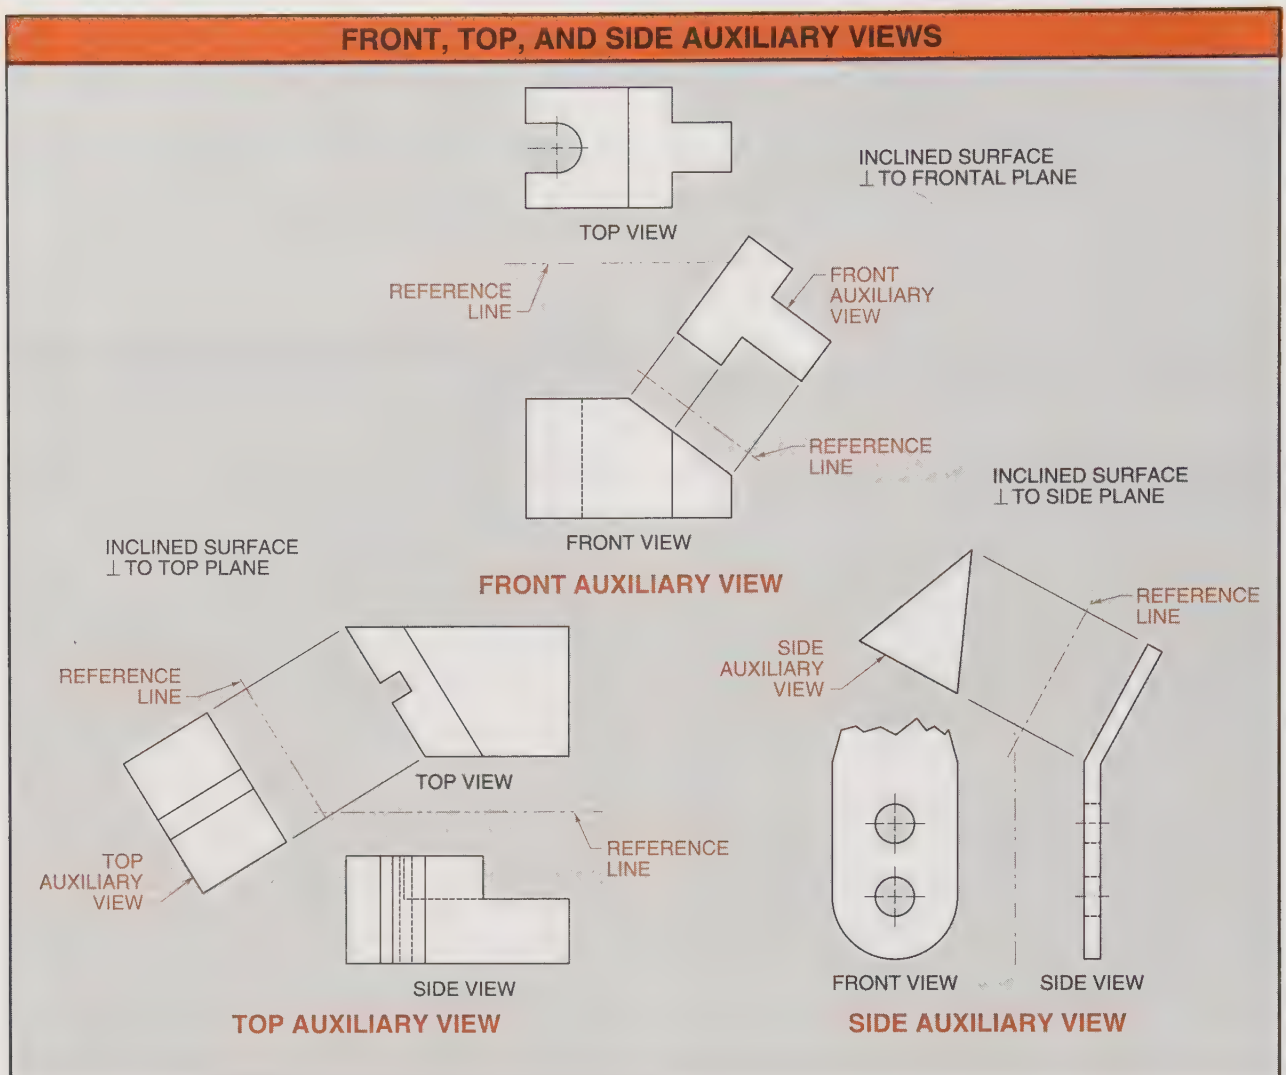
Primary auxiliary views are classified according to the plane to which the auxiliary view is hinged.
